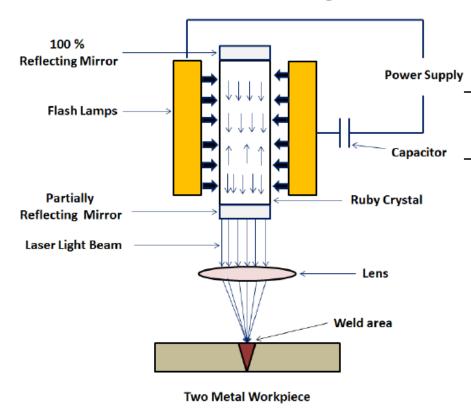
Schematic diagram of laser beam welding system
